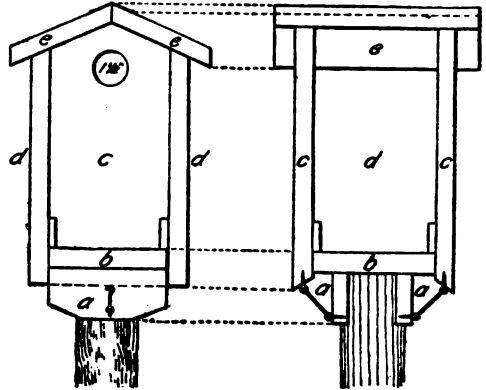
Diagrammatic drawings of bluebird house. This house can be removed from its floor by unfastening two wire hooks.
